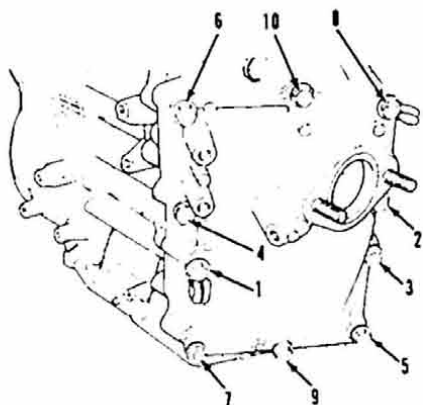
Securely tighten intake manifold screws in sequence shown.
